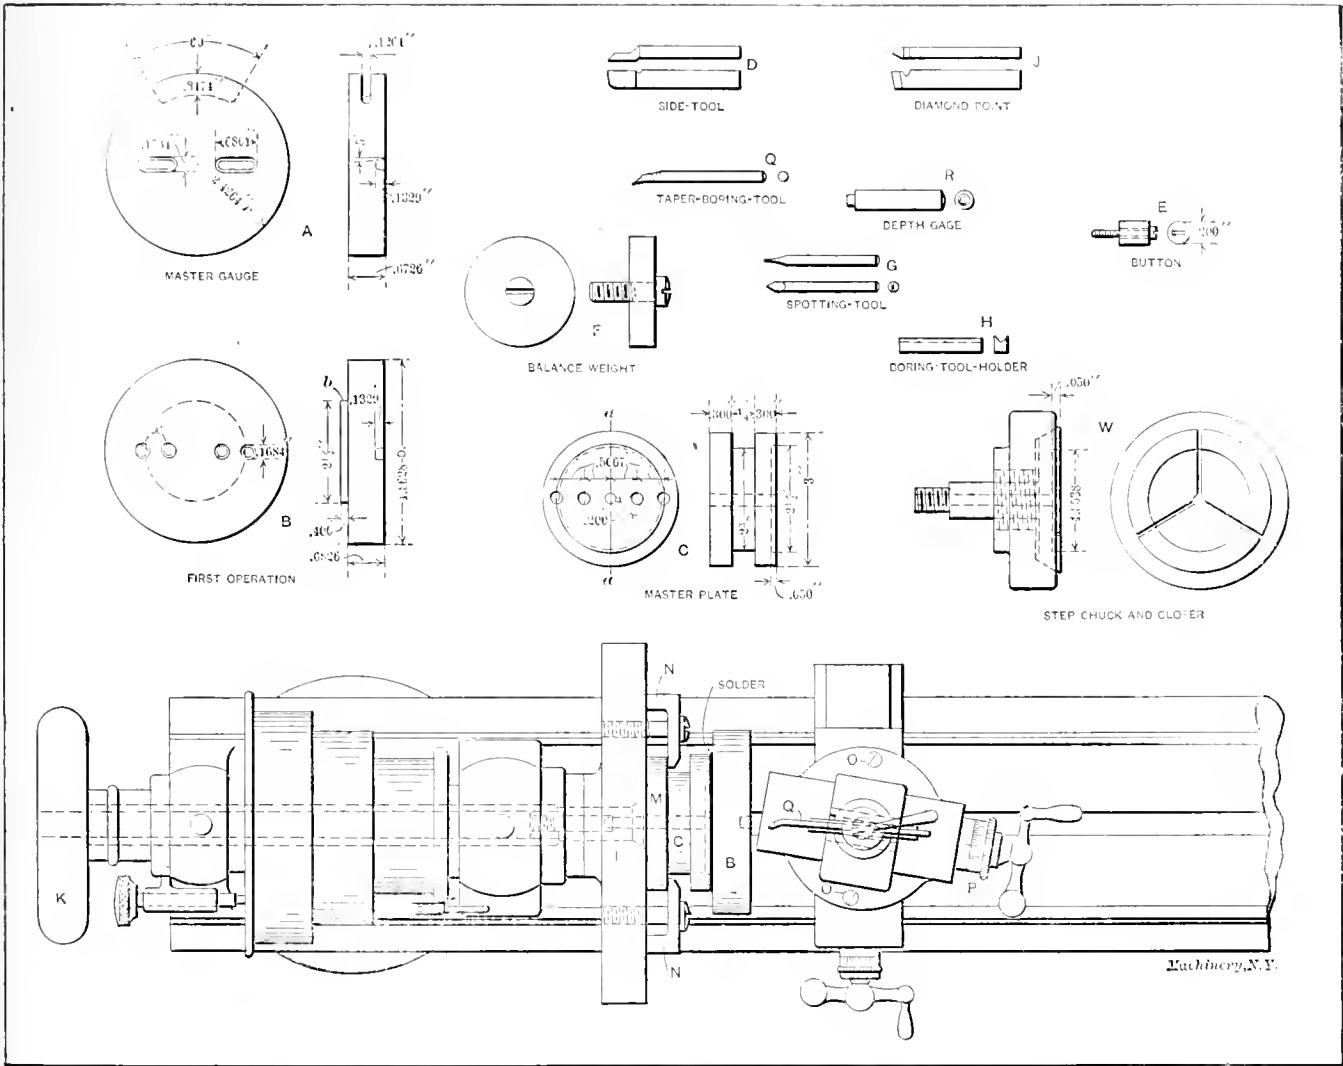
Plan View of the Bench Lathe arranged for Boring the Tapered Holes in the Face of the Gage, and Miscellaneous Tools
